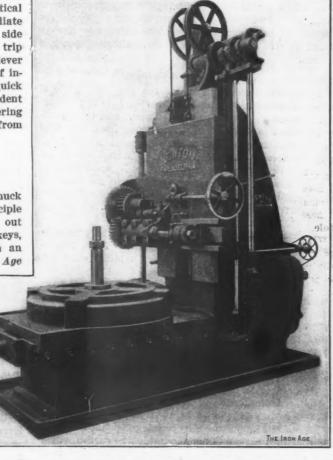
A View of the Opposite Side of the Newton 40-In. Automatic Spur Gear Cutter.
